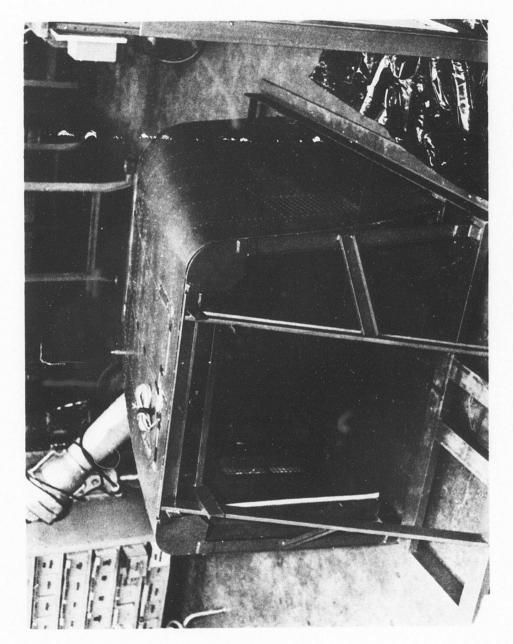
Main Rotor Pylon, Hinged Cover Assembly.
